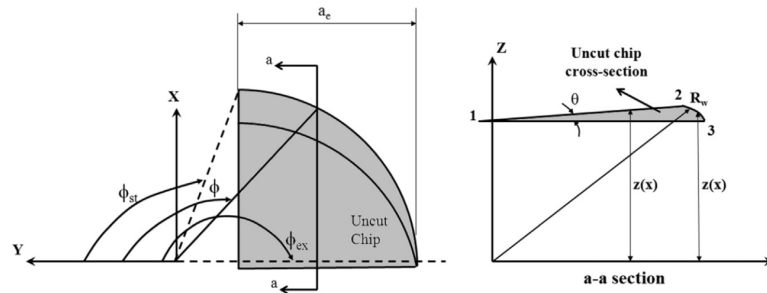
Scheme of uncut chip geometry for tangential turn-milling (Karaguzel et al., 2015a).
